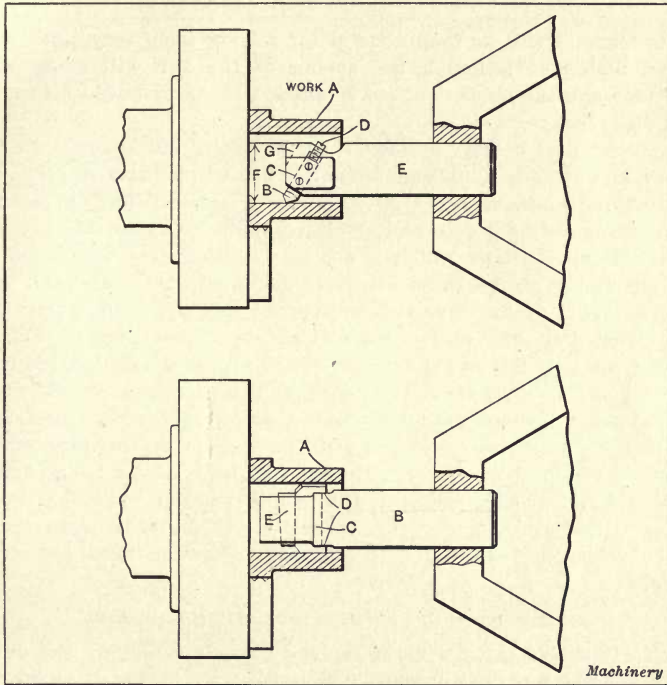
(Upper View) Boring-bar with Adjustable Cutter; (Lower View) Boring-bar with Double-ended Cutter
